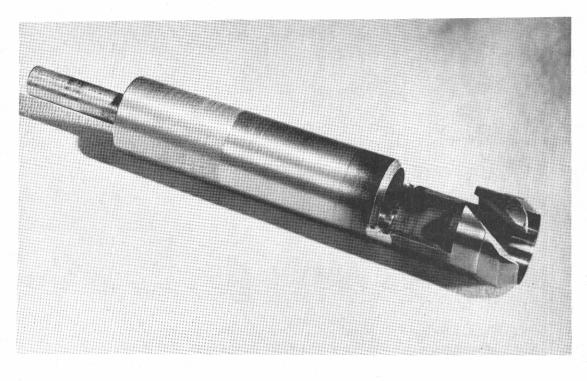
Cutter after extension was added so plugs 4 to 5 inches in length could be cut.
